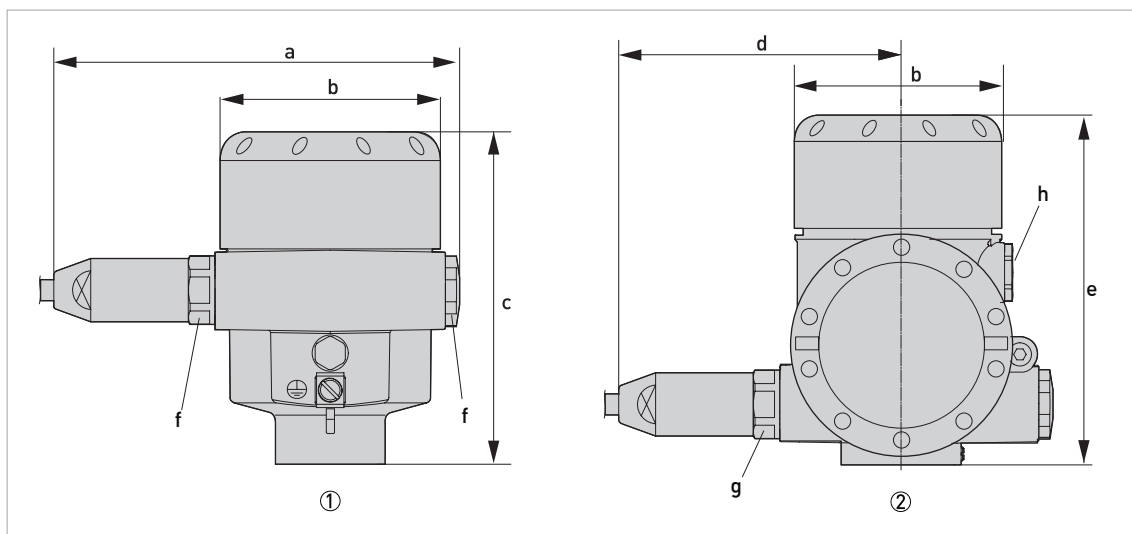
Aluminium housing in IP66 / IP68 version (1 bar)
